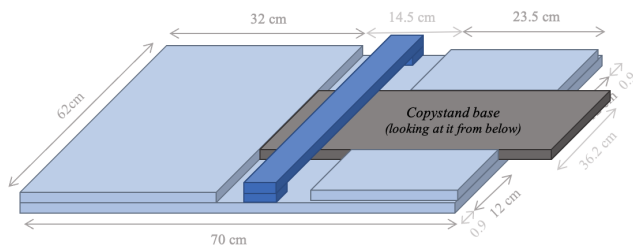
Bottom of the cradle (as in Figure 6) showing the joint bar used to fix the copystand base to the book cradle.
